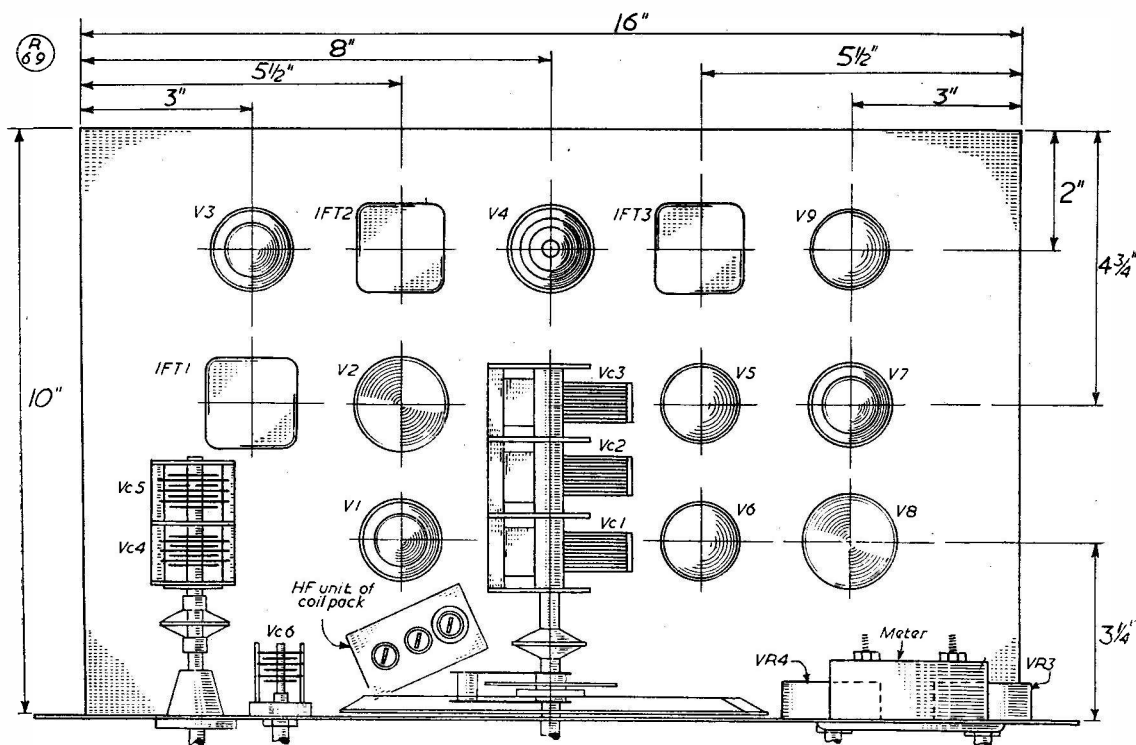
Chassis layout drawing, showing general arrangement of main components. If a shell this size is used it will be found convenient to follow the layout given.
